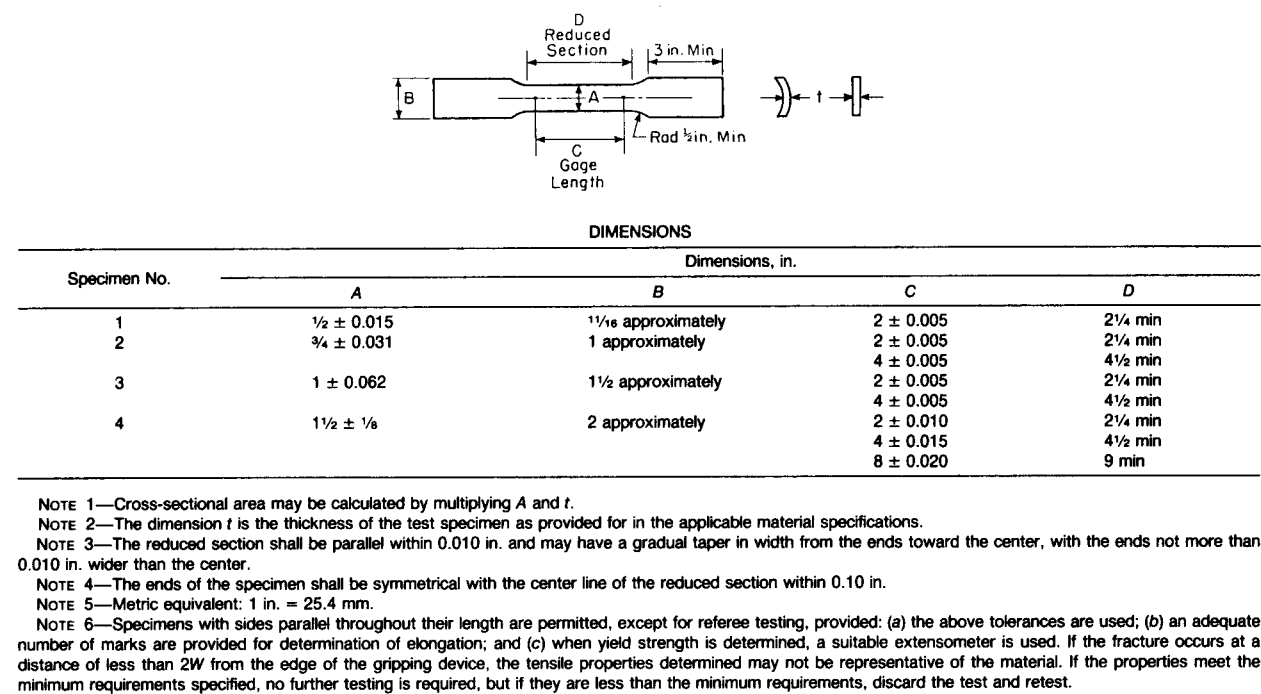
DIMENSIONS AND TOLERANCES FOR STRIP TENSION TEST SPECIMENS FOR LARGE DIAMETER TUBING
